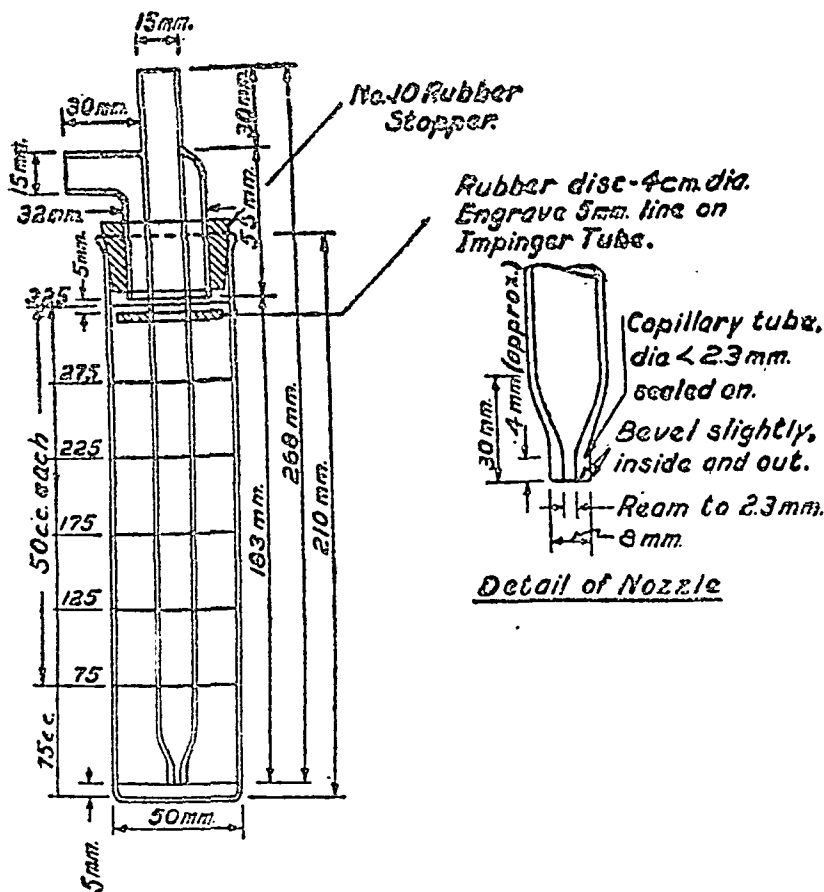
FIGURE II—DRAWING OF MODIFIED IMPINGER AND DETAIL OF NOZZLE, WITH CONSTRUCTION SPECIFICATIONS
